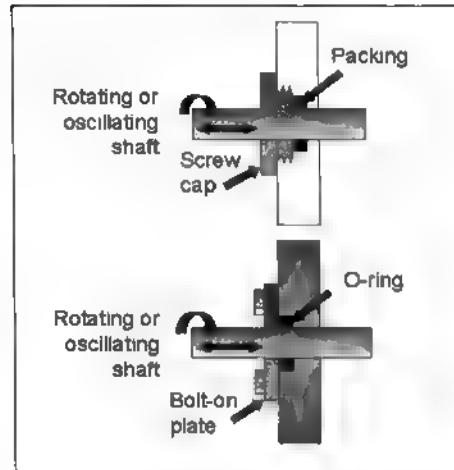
Two alternative types of stuffing box, one using packing, the other an O-ring. Either can employ a screw cap or a bolt-on plate to enclose the stuffing box.
